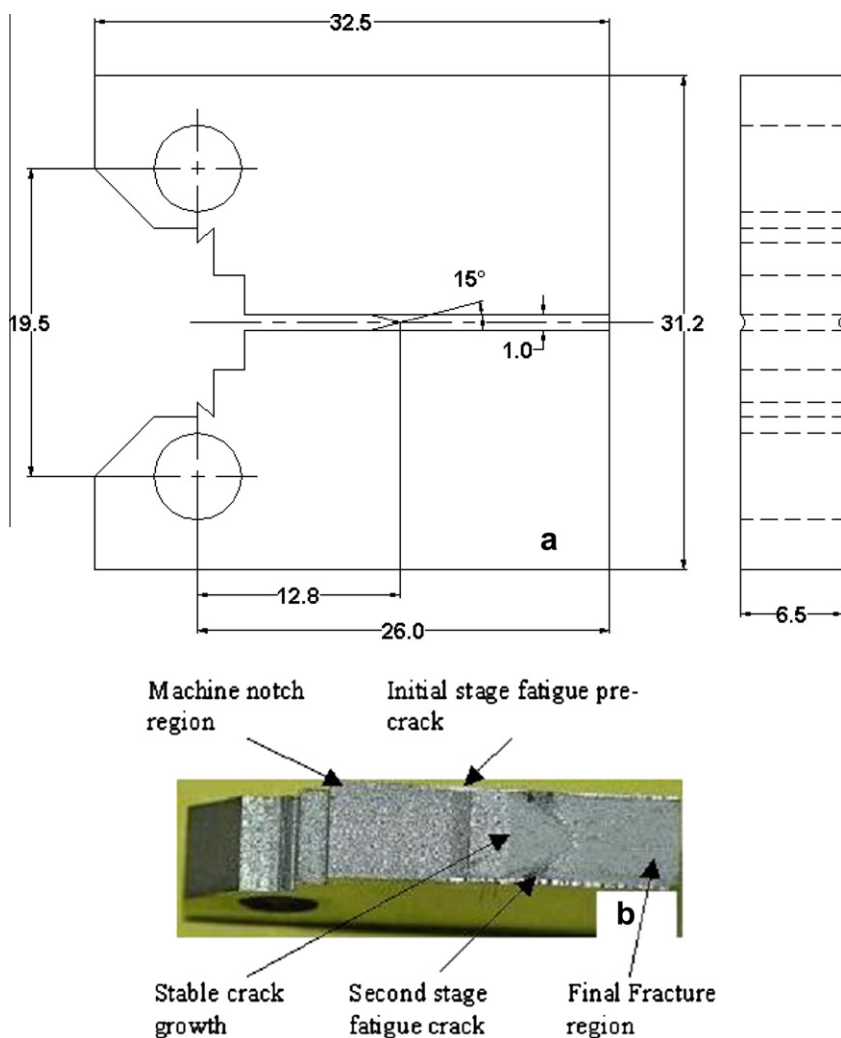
(a) J_{IC} (fracture toughness) test specimen (ASTM E1820) and (b) typical fracture surface after test.
